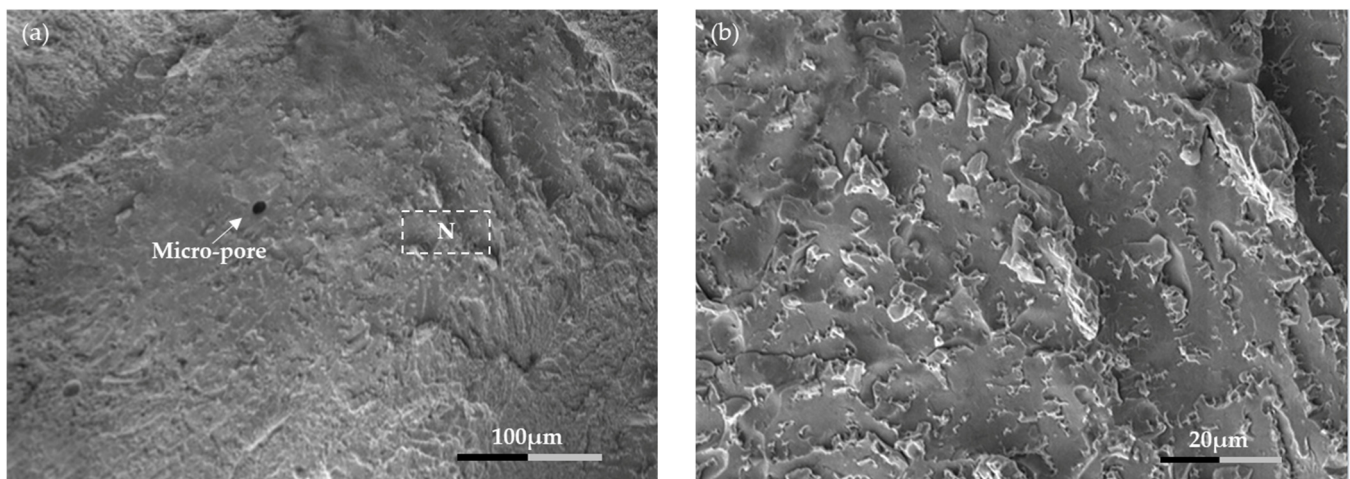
SEM image of fracture interface in fracture mode II: (a) Fracture surface on NiTi side; (b) High magnification image of N.
